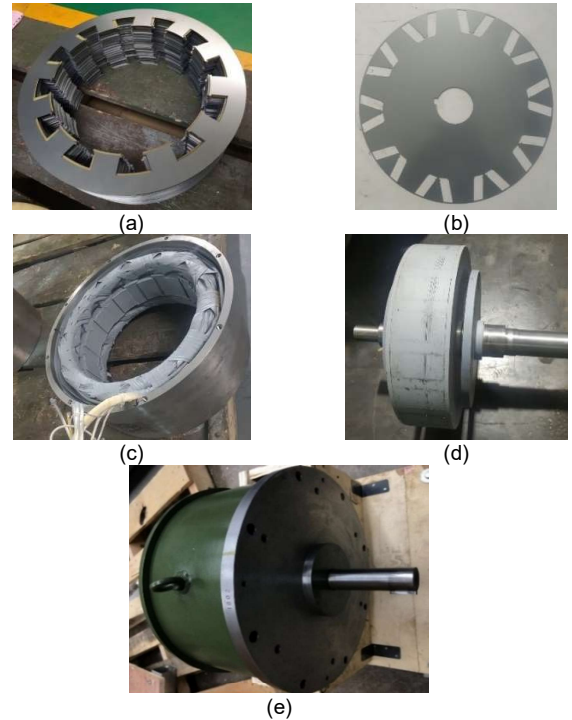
Assembly of V-shape prototype machine (a) Stator Laminations (b) Rotor Laminations (c) Stator stack in the housing (d) Rotor stack with inserted magnets (e) Full assembly
